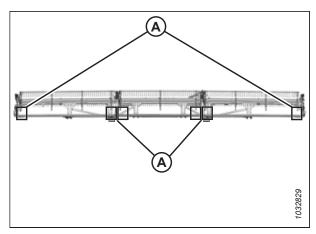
FlexDraper® Measurement Locations – Triple Reel
